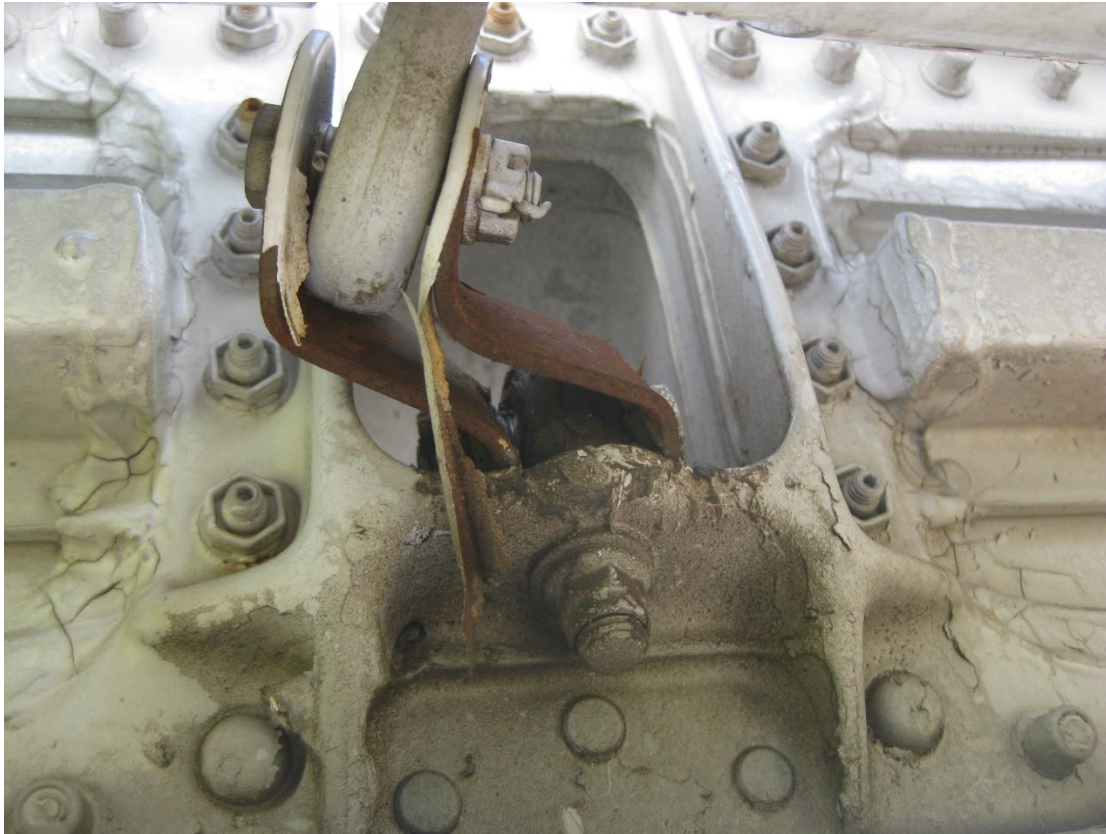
Left-hand elevator and inboard geared tab attachment linkage, looking forward into the horizontal stabilizer, viewed from underneath the left elevator.
